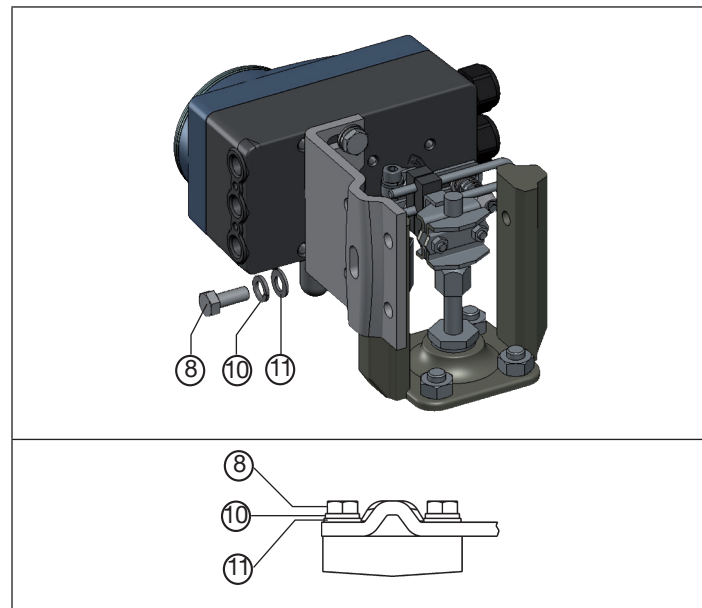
Attach positioner with mounting bracket; for actuators with cast frame
